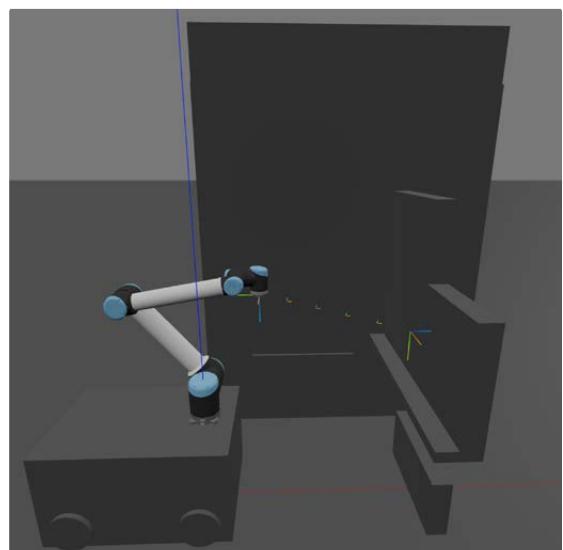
Simulation showing a cobot on a mobile platform in front of a CNC machine
